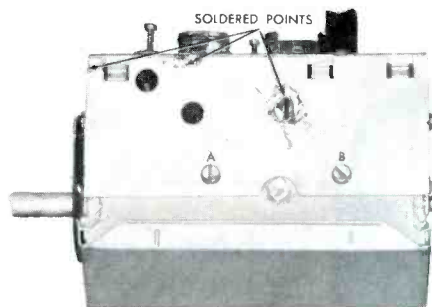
Screws and Soldered Points Which Hold Side Cover in Place.
